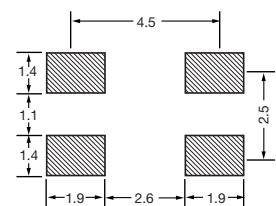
ECX-64CEN - Recommended Solder Pad Layout
